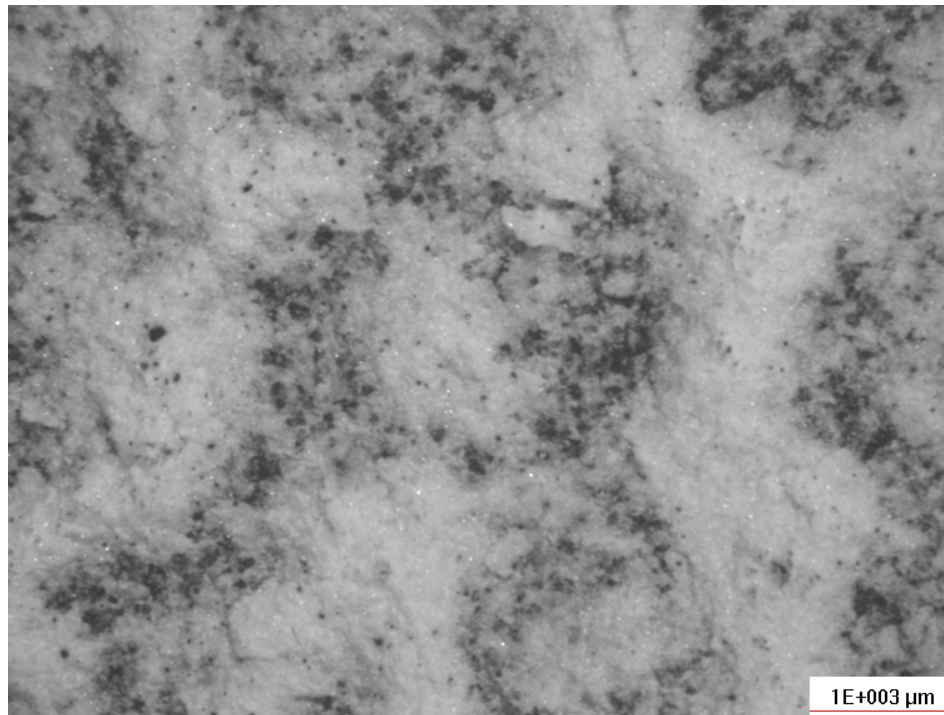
Structure of a dimple on the 45mil fracture surface. Raised outer ring with lower flat internal ring and a raised center peak.
